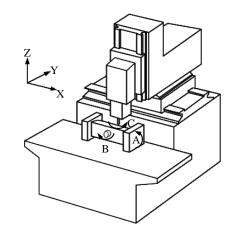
Schematic diagram of 6-axis EDM machine kinematic structures for machining integral shrouded blisk
